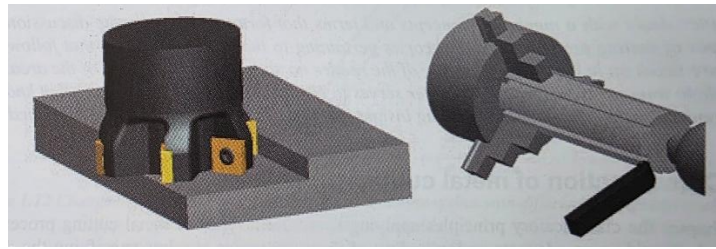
Intermittent cutting process, illustrated on the left-hand side and continuous cutting process on the right. [19]
